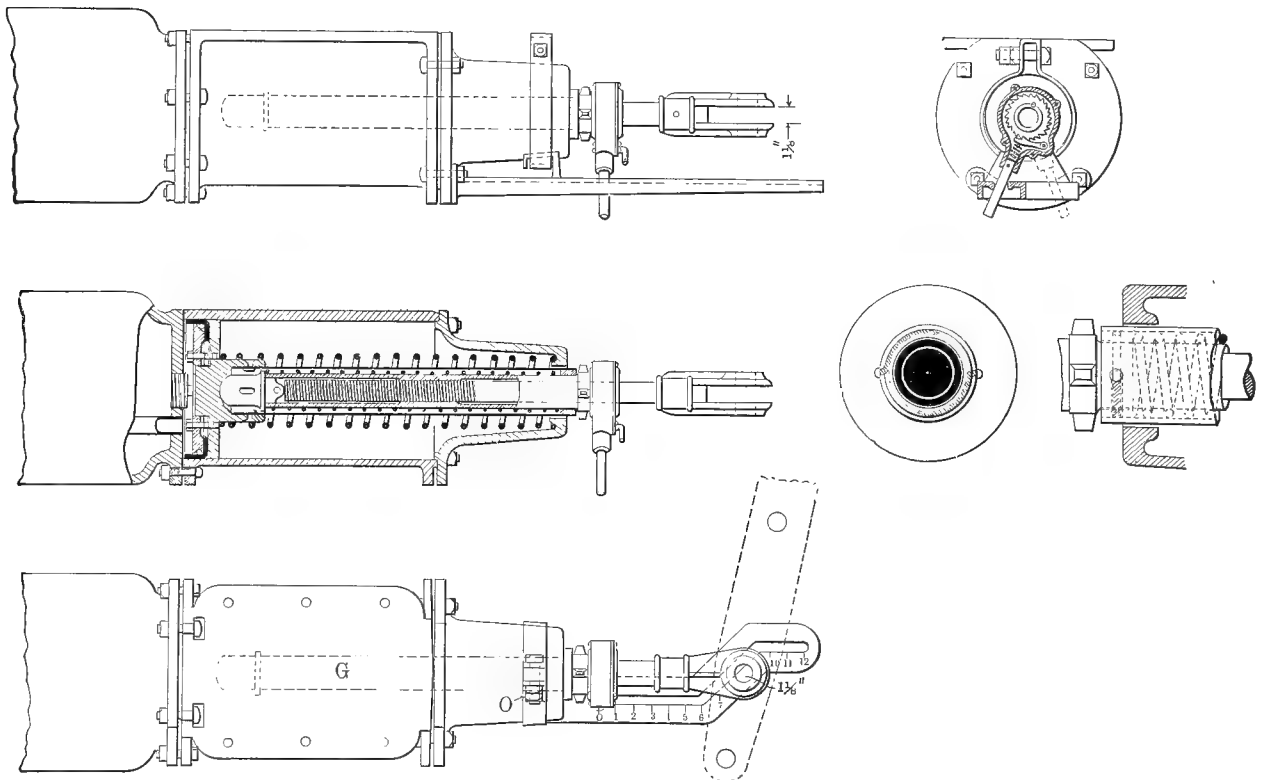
Creco Combined Slack Adjuster and Brake Release for Freight Cars. Chicago Railway Equipment Company.
